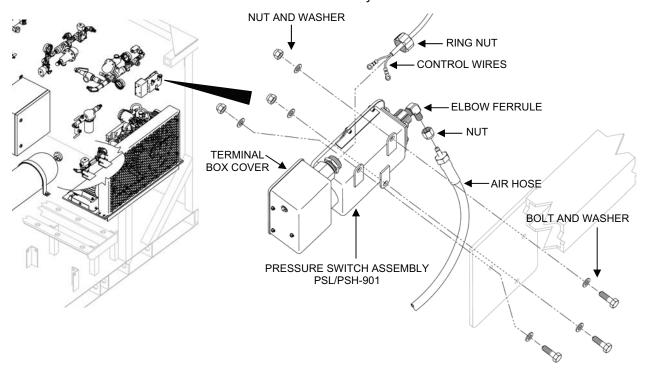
Pressure Switch Assembly PSL/PSH-901 Replacement.
